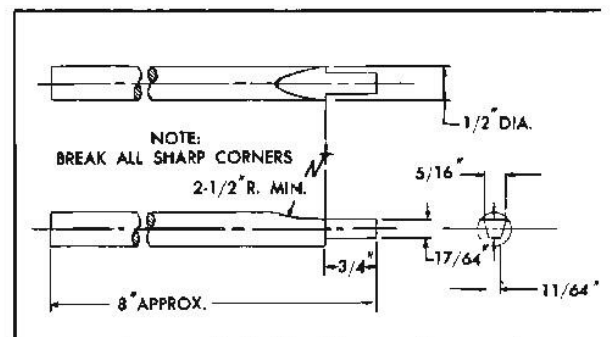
Rear Main Bearing Oil Seal Tool
